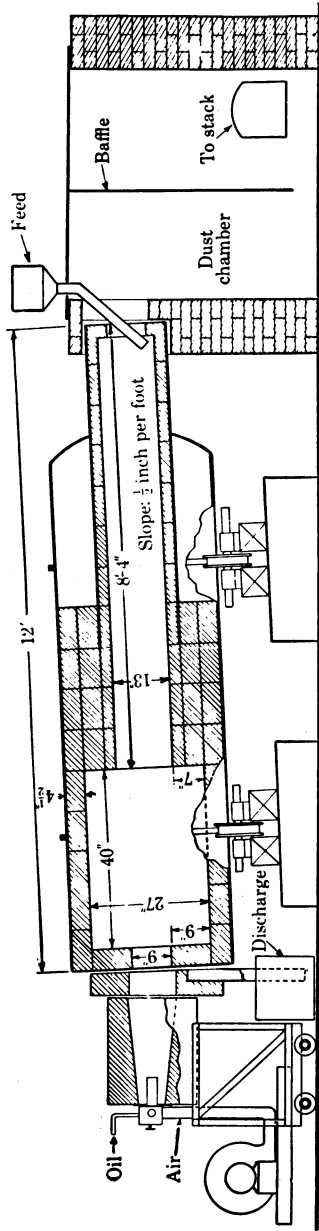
SECTION OF LARGE KILN TESTED AT SEATTLE.
